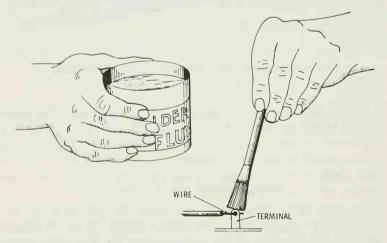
Apply a coating of rosin flux to the mechanical connection of the wire and the terminal before soldering.
